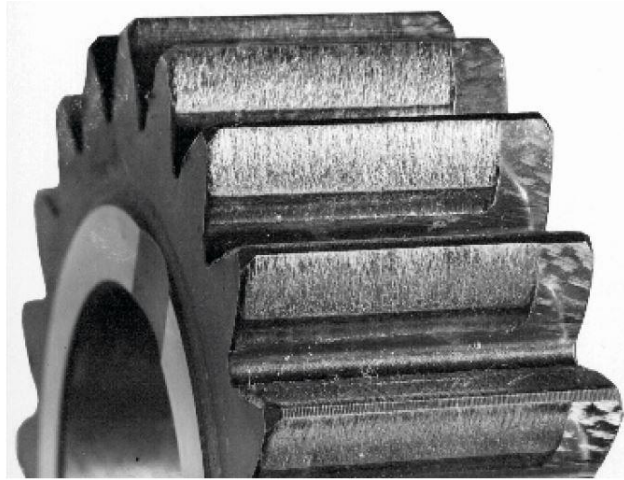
Seizure over the total width of the gear contact pattern of a gear [27]
